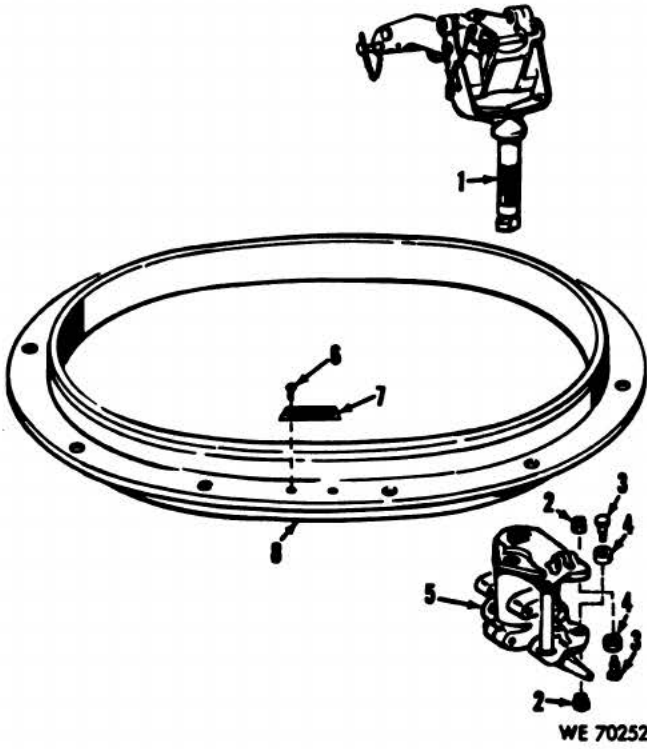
Mount, gun, ring, M19C-7115031—partially exploded view.
